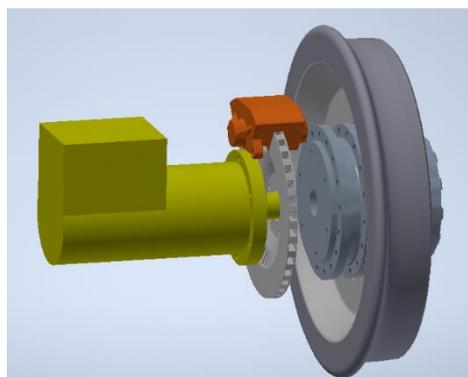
Rough model with Rexroth motor and wheel drive unit. A disc brake is placed between the motor and drive unit.
